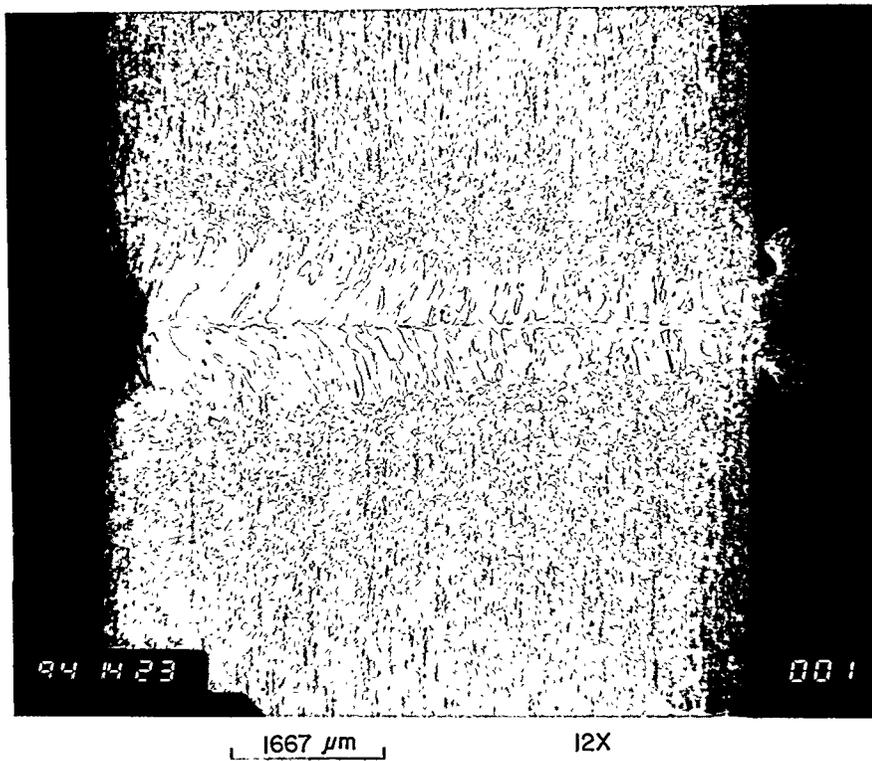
Transverse cross-section of full penetration electron beam weld in 7 mm thick V-5Cr-5Ti alloy.
